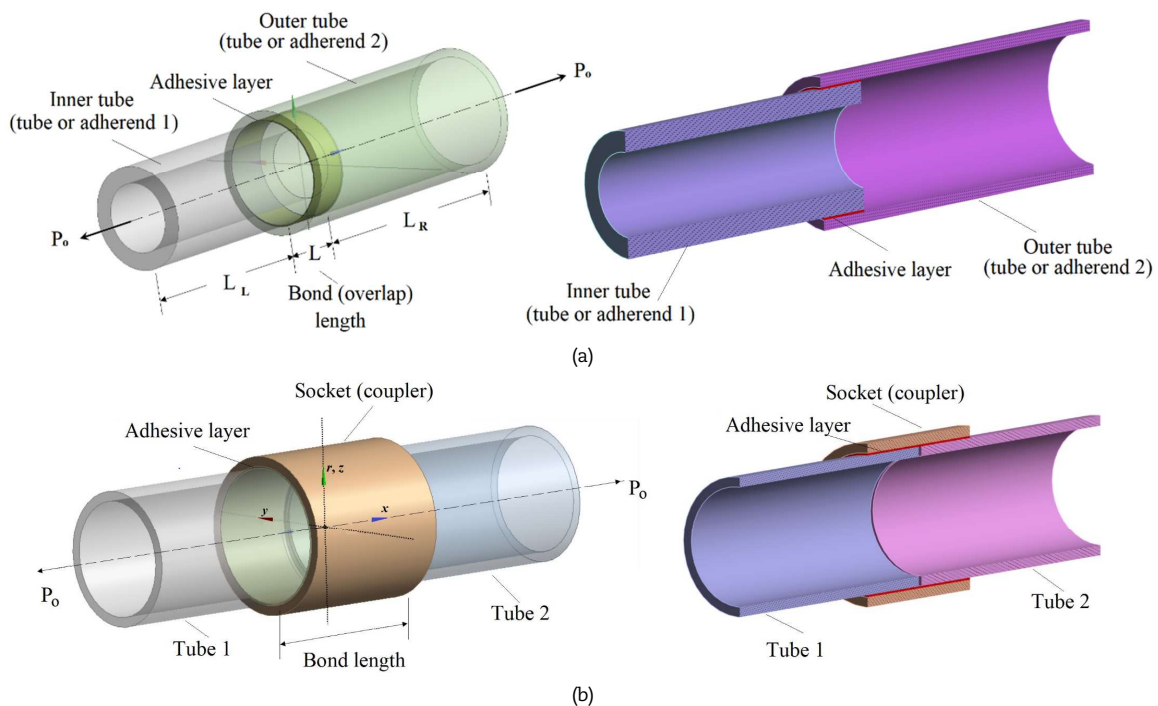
Schematic diagrams of two adhesively bonded tubular joints, (a) A tubular adhesively bonded single-lap joint, (b) A tubular adhesively bonded socket joint.
